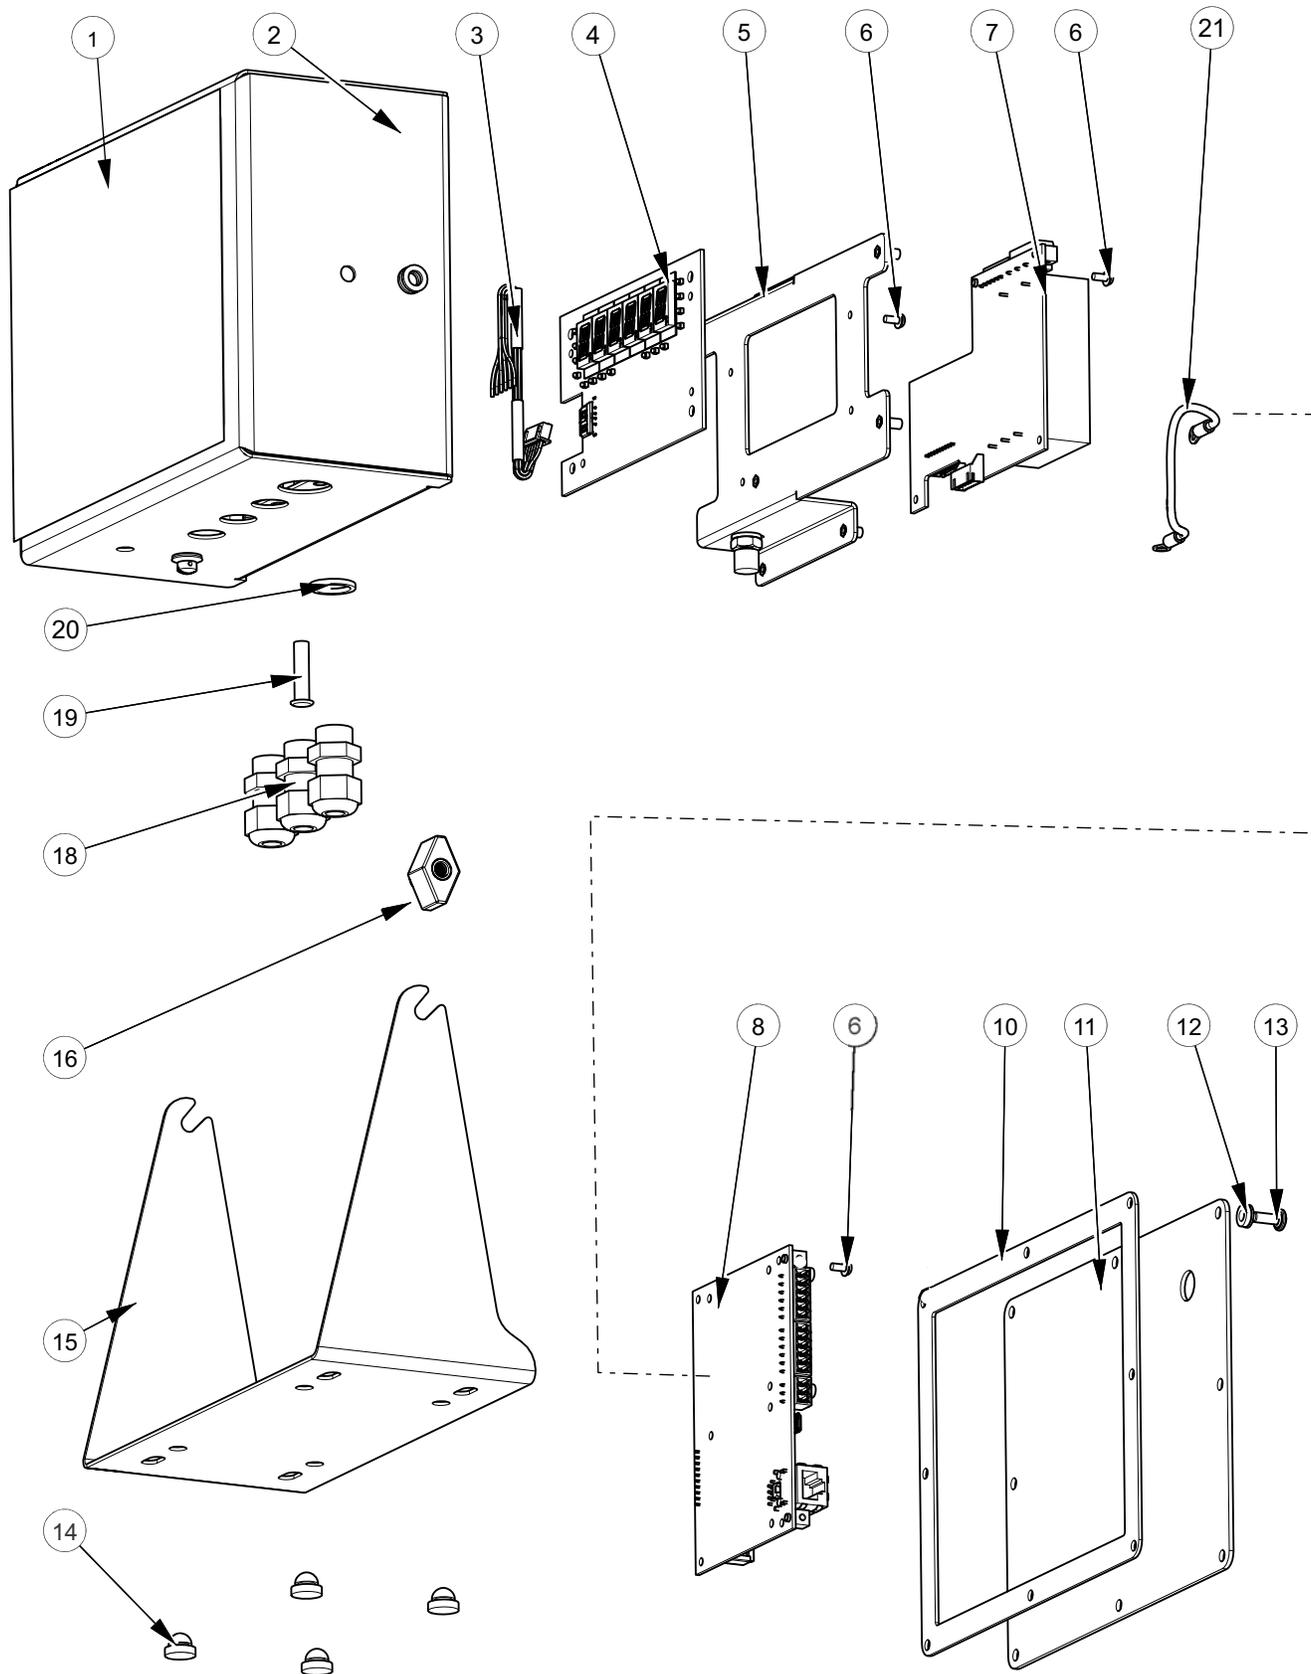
880 Indicator Universal Mount Repair Parts Drawing
